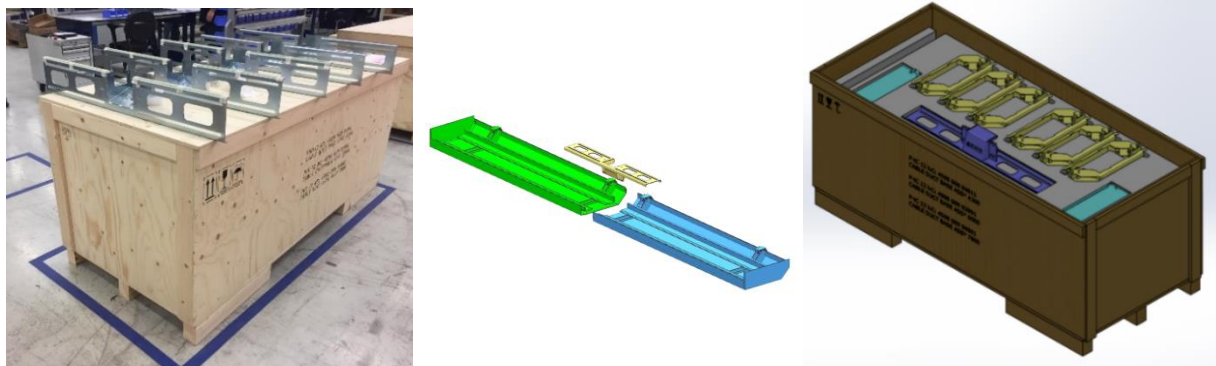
CD: Picture (Left), Exploded View (Middle), On Dedicated Pallet (Right)
